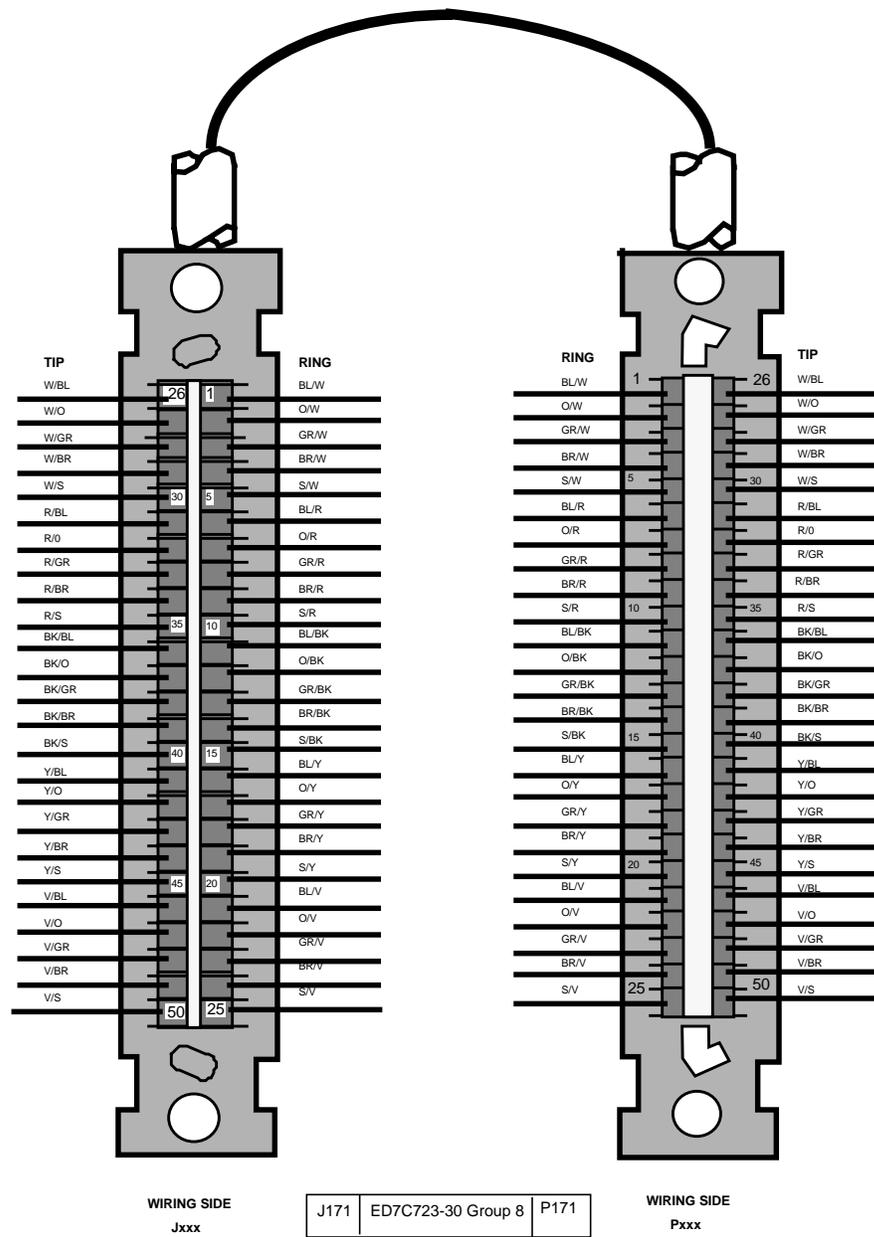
Cable Assembly ED7C723-30 Group 8
